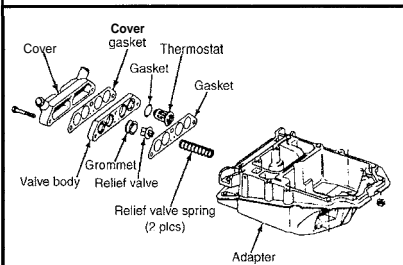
Exploded view of the thermostat assembly-65 Jet-115 hp (1632cc) 90CV4 motors
